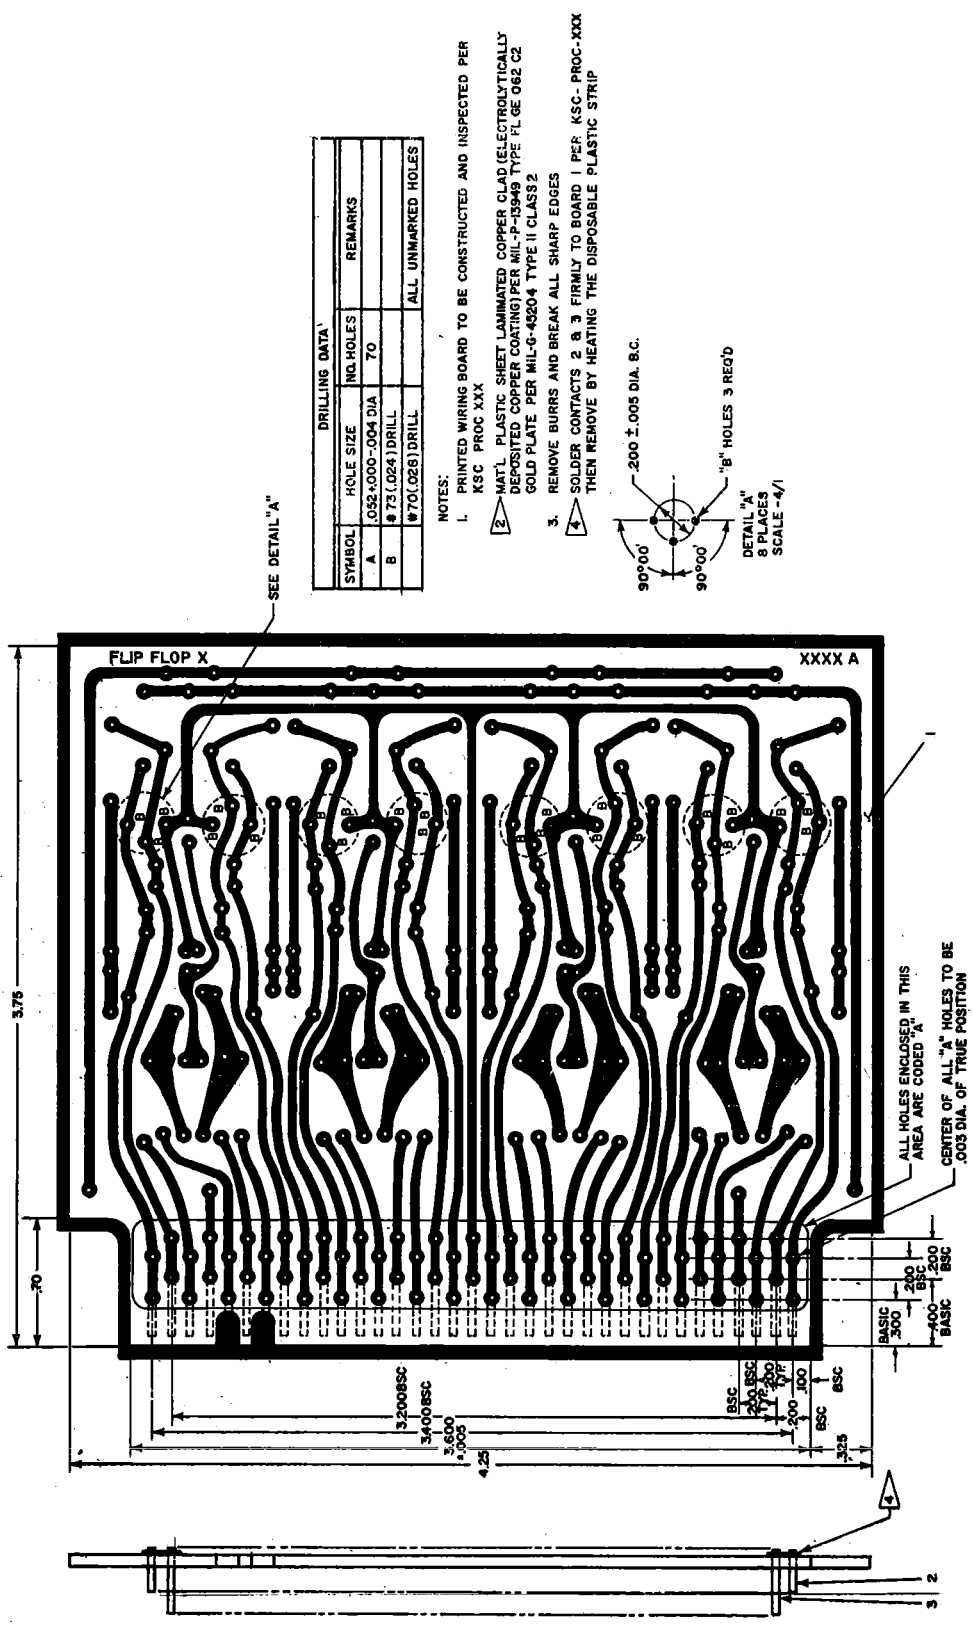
Example of a Printed Wiring Assembly Drawing
